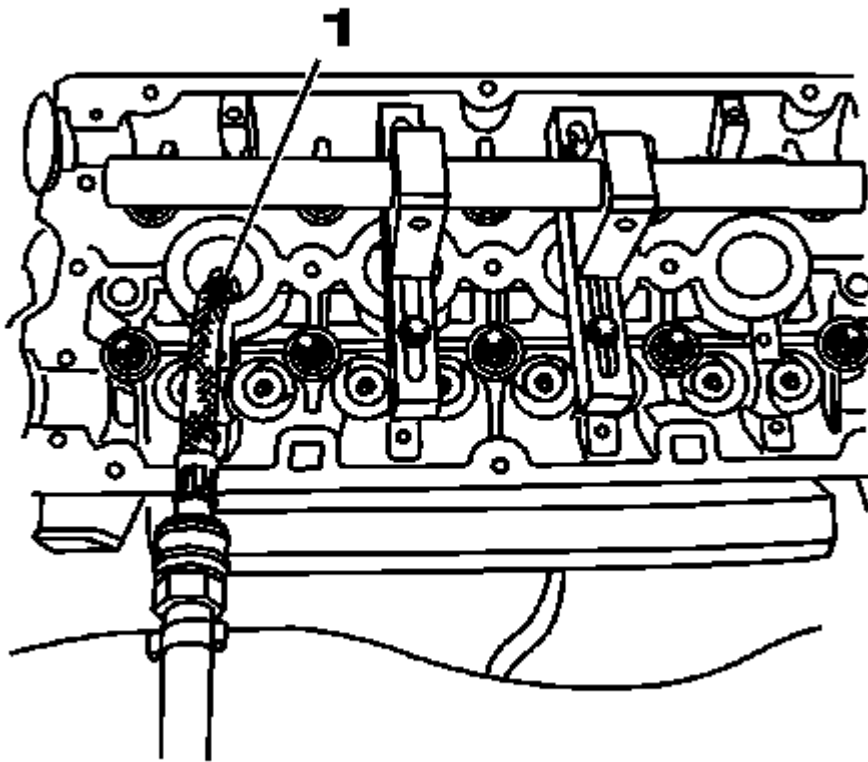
View Of MKM-6086-15 Pneumatic Adapter
